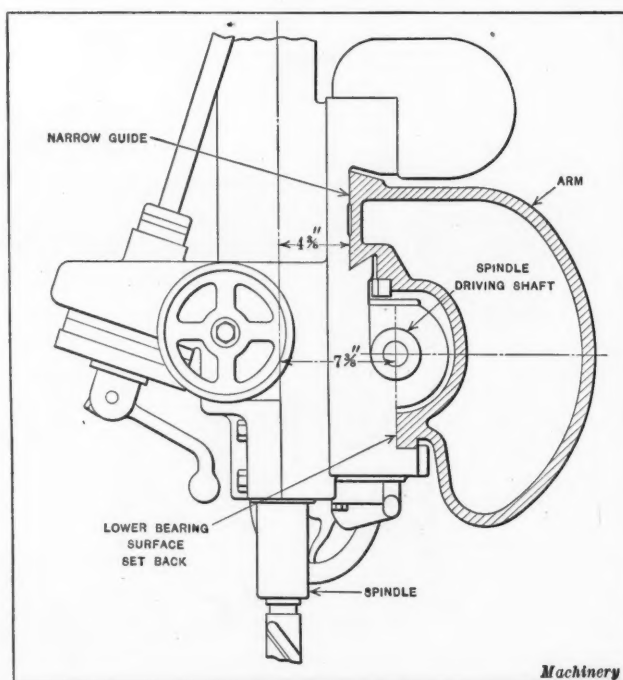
Cross-section of Radial Arm, showing Lower Bearing set back of Upper Guide to bring Spindle Driving Shaft close to Spindle
